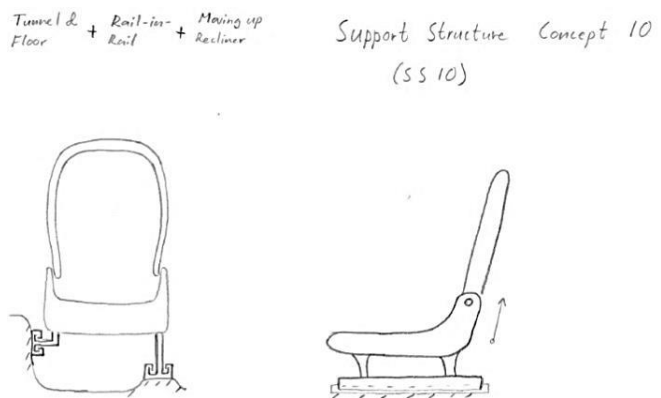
SS10, heightened recliner mounted in tunnel and floor
